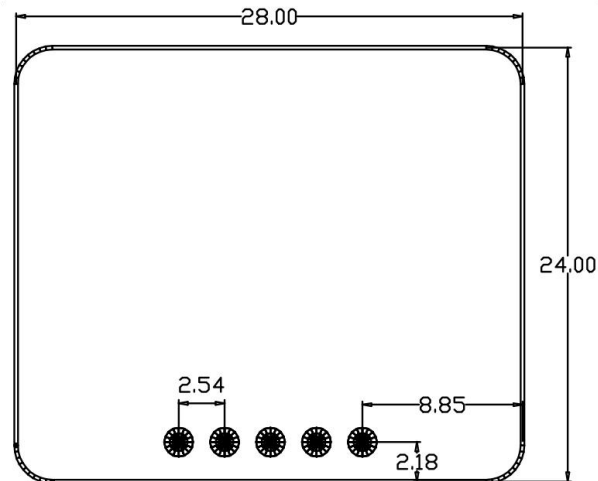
Recommended PCB Footprint Dimensions (Unit: mm)
